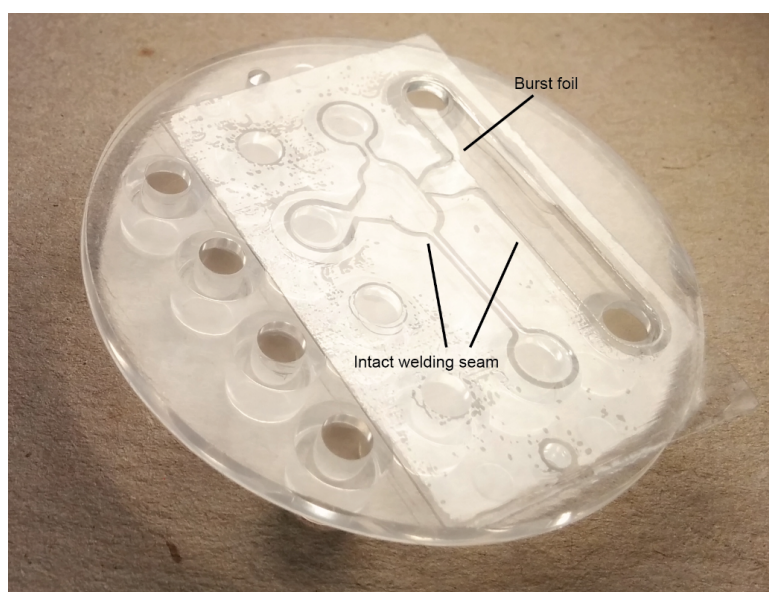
Chip failure during pressure testing. To investigate the bonding strength of the welding seams pressurised air was applied to the chip inlet, while the other connectors were blocked. Design A1 failed after applying 3.5 bar (see photograph). The mode of failure was bursting of the 152 μm thick foil. Note that the welding seam is intact, as is visible by the darker surface. Design A2 with the 500 μm thick foil did not fail within the testing limits, which was up to 8.5 bar.
